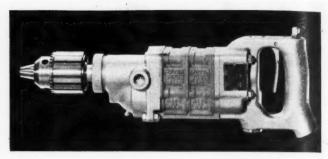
Air Drill Equipped with Spade Handle, Made by the Rotor Tool Co.
